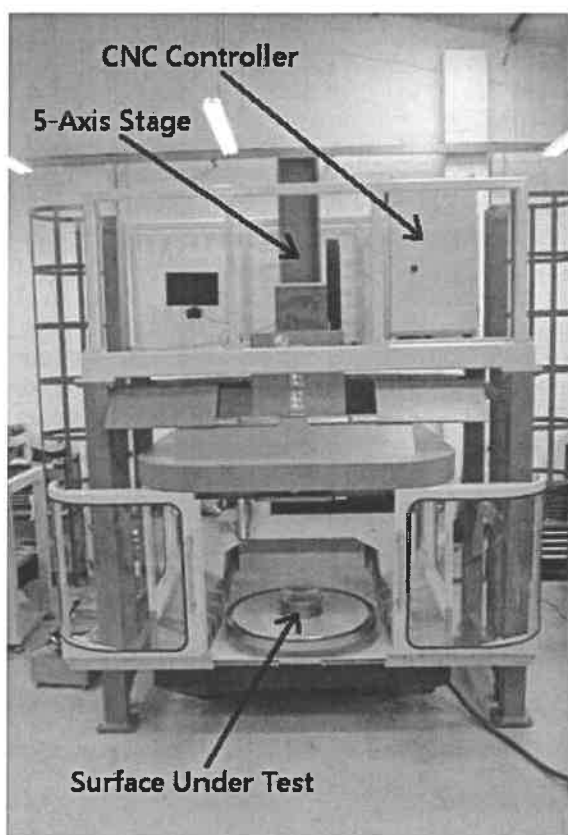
Complete system of IRP polishing machine, 5-axis CNC stage and Fizeau interferometer for on-machine testing.
